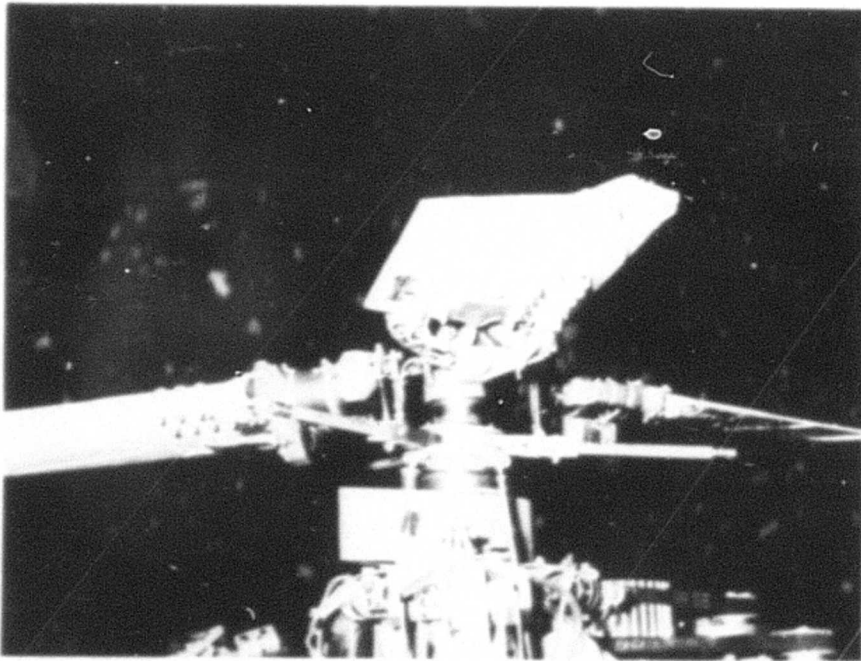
ROTOR DAMAGE, FIBERGLASS BLADE FAILURE
